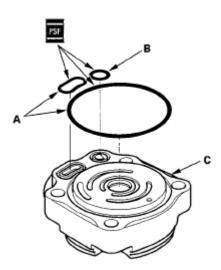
Identifying Pump Cover Seals, O-Ring And Pump Cover Courtesy of AMERICAN HONDA MOTOR CO., INC.
